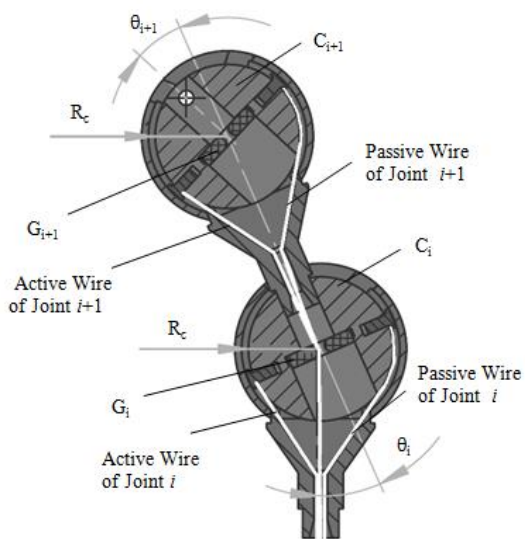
The crossing of driving wires through inner joints structure of robotic arm
